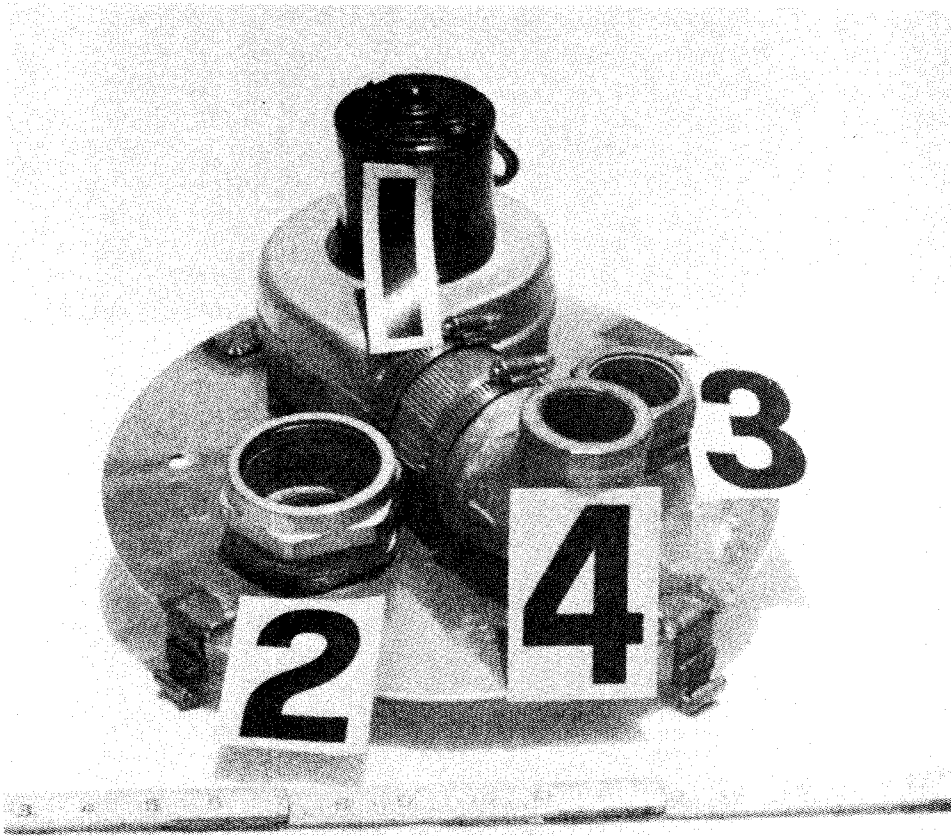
Assembled and installed blower (#1), extension assembly (#4), and conduit connectors for gas inlet (#2) and outlet (#3) on lid of filter unit. Note hook attachments at edge of lid for latches.
